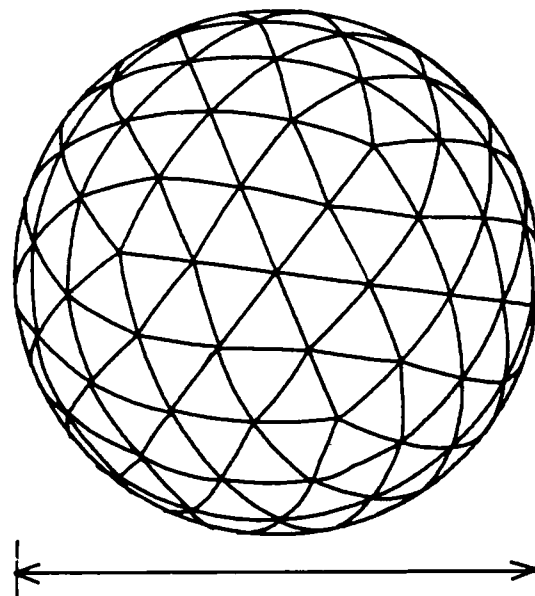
A Perspective View of the Rotor and Surface Bars.
